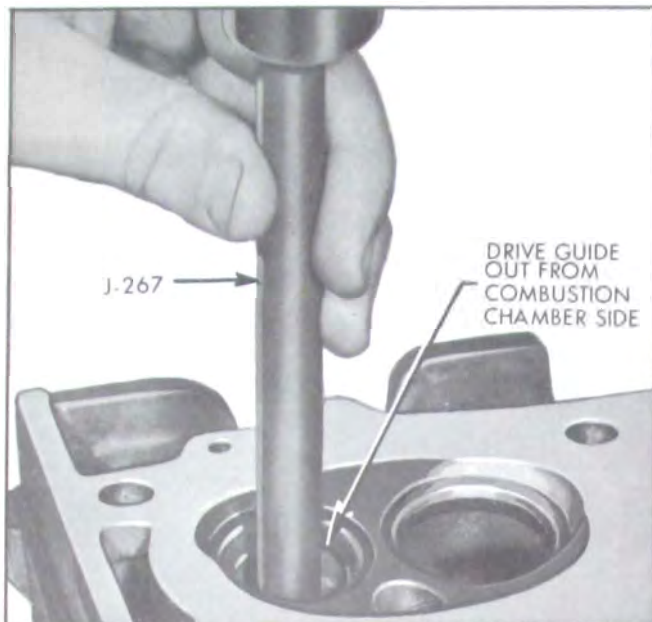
Removing Valve Stem Guide (V-8 only)
